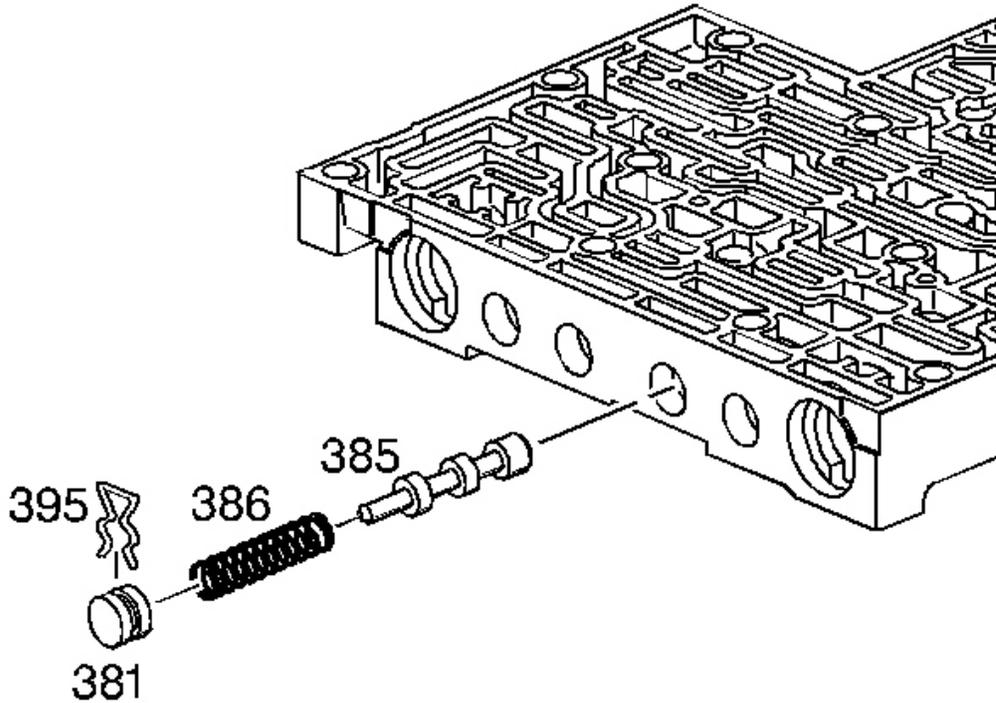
Bore Plug Retainer, Bore Plug, 3-4 Shift Valve Spring & 3-4 Shift Valve
